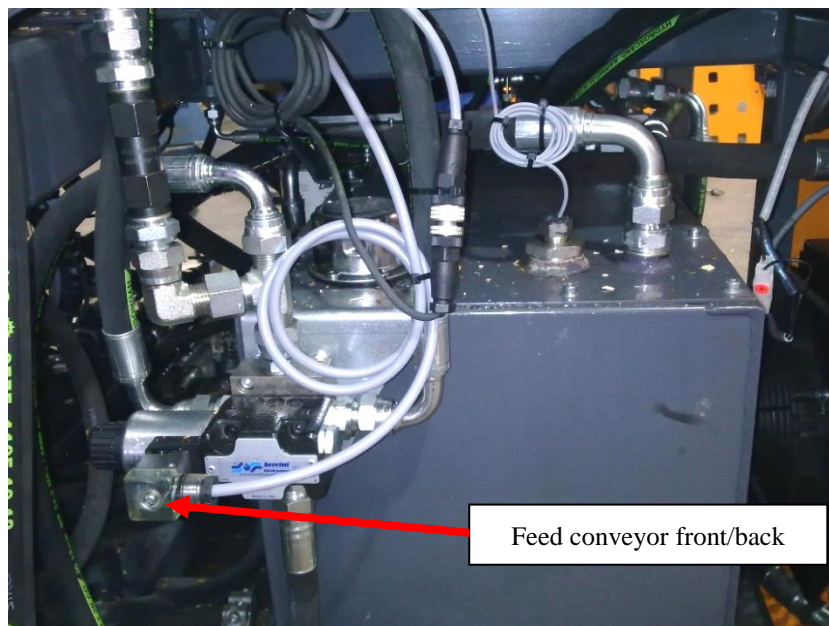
Directional control valve of the feed conveyor (behind the machine, attached to the oil tank)
